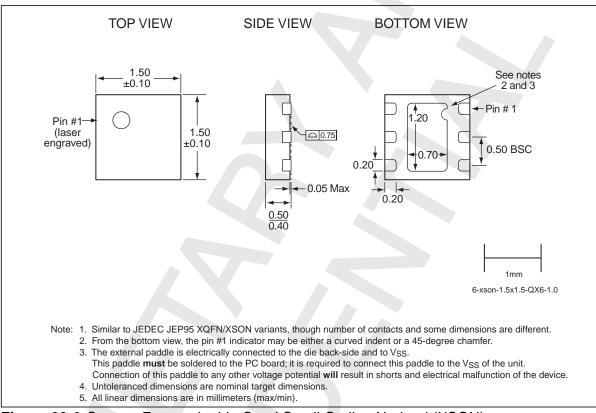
6-Contact Extremely-thin Quad Small Outline No-lead (XSON) SST Package Code: QX6
